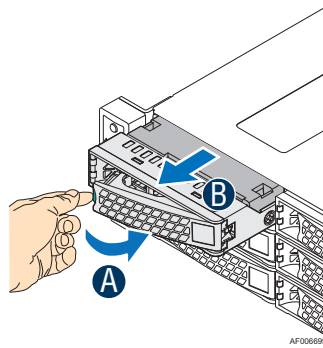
3.5" HDD Assembly – Removing the Carrier
